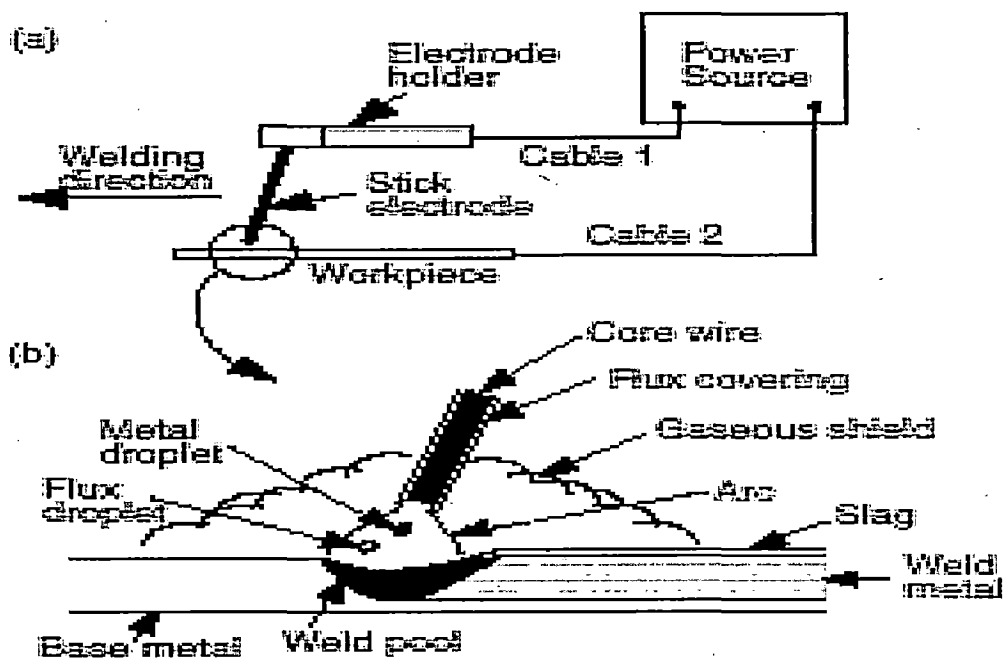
Shielded metal arc welding: (a) overall process; (b) welding area enlarged [30].
